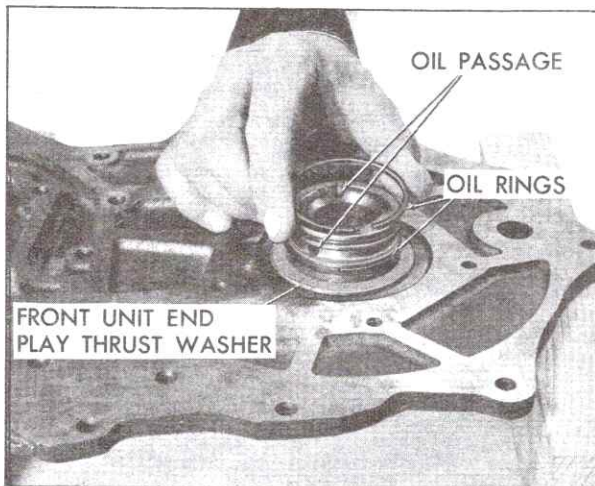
Installing Oil Rings on Driven Sprocket Support
